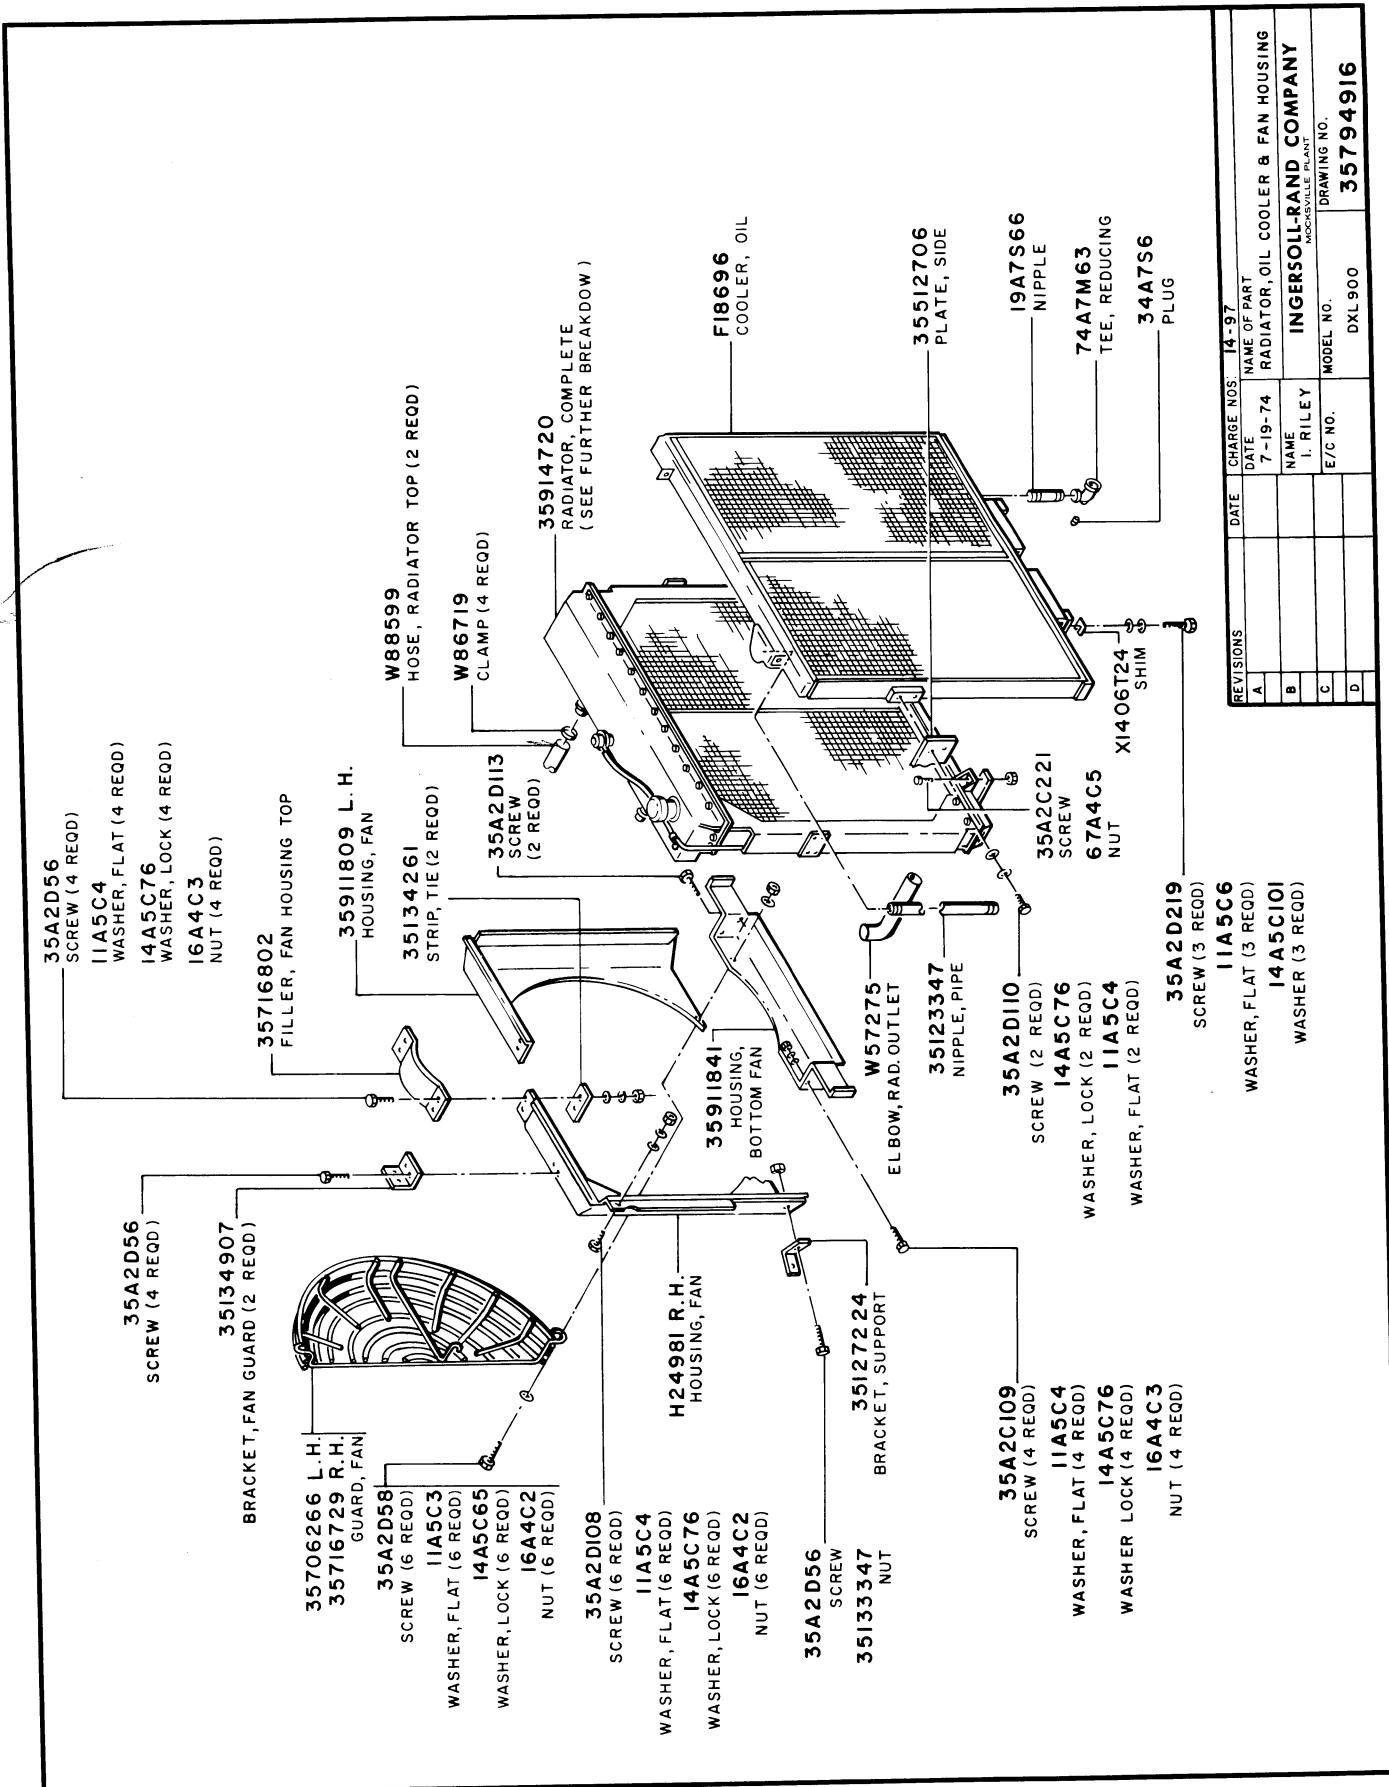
Radiator, Oil Cooler and Fan Housing
